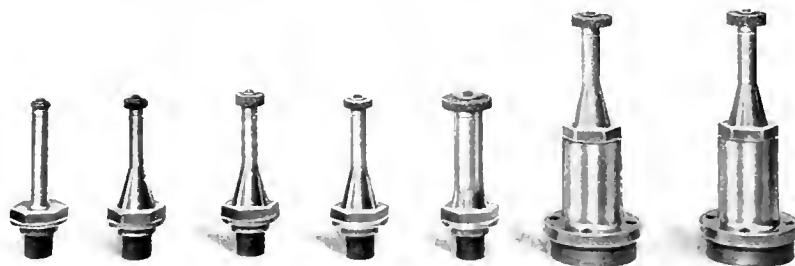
A Set of Grinding Spindle Extensions for the Duplex Grinder
